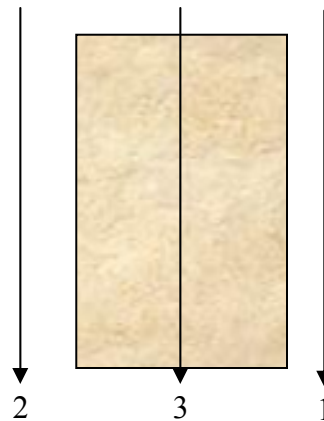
Scanning Pattern for Deposition of Solder Mask on Gold Pads.
